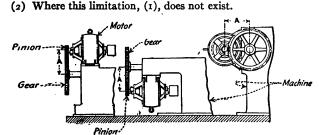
Motor mountings for gear drive (distances between gear cente limited).
